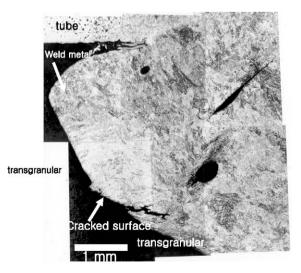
Fracture surface of damaged header and tube weld.
